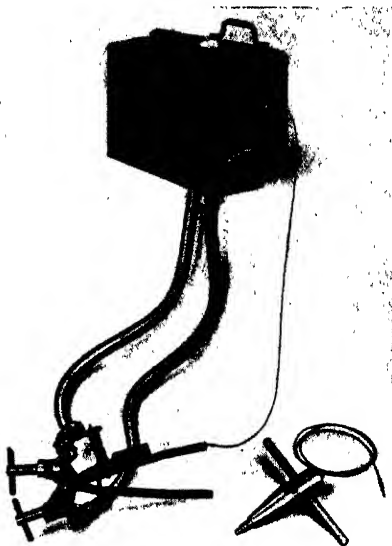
A LIGHT-PATTERN PORTABLE SPOT WELDER
